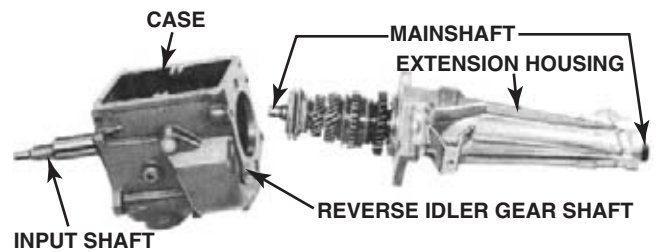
With this transmission, the extension housing is removed along with the mainshaft assembly. The main drive gear can be separated and removed at this point.
